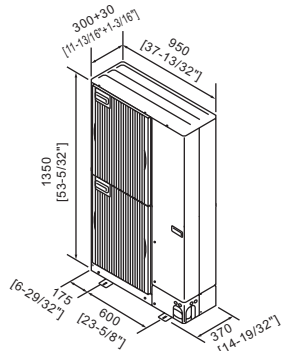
PUMY-P-YHMB, VHMB dimension
